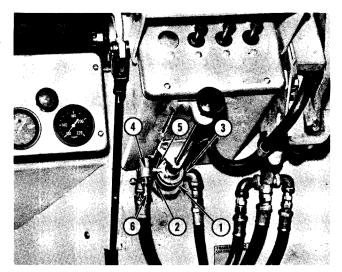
CLUTCH BRAKE PRE-SELECT VALVE
